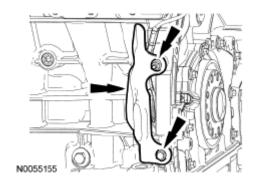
Locating Heat Shield Nut And Bolt Courtesy of FORD MOTOR CO.
